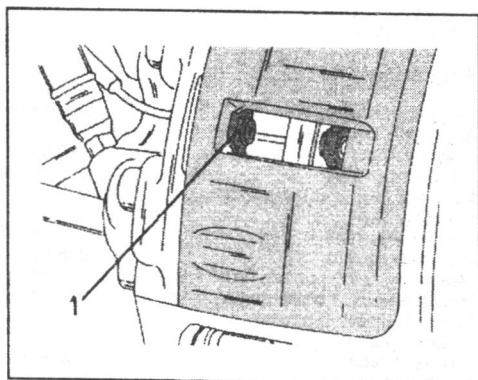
Apply a pair of pliers between the inner brake pad (1) and the caliper housing to push the piston into the bore.
